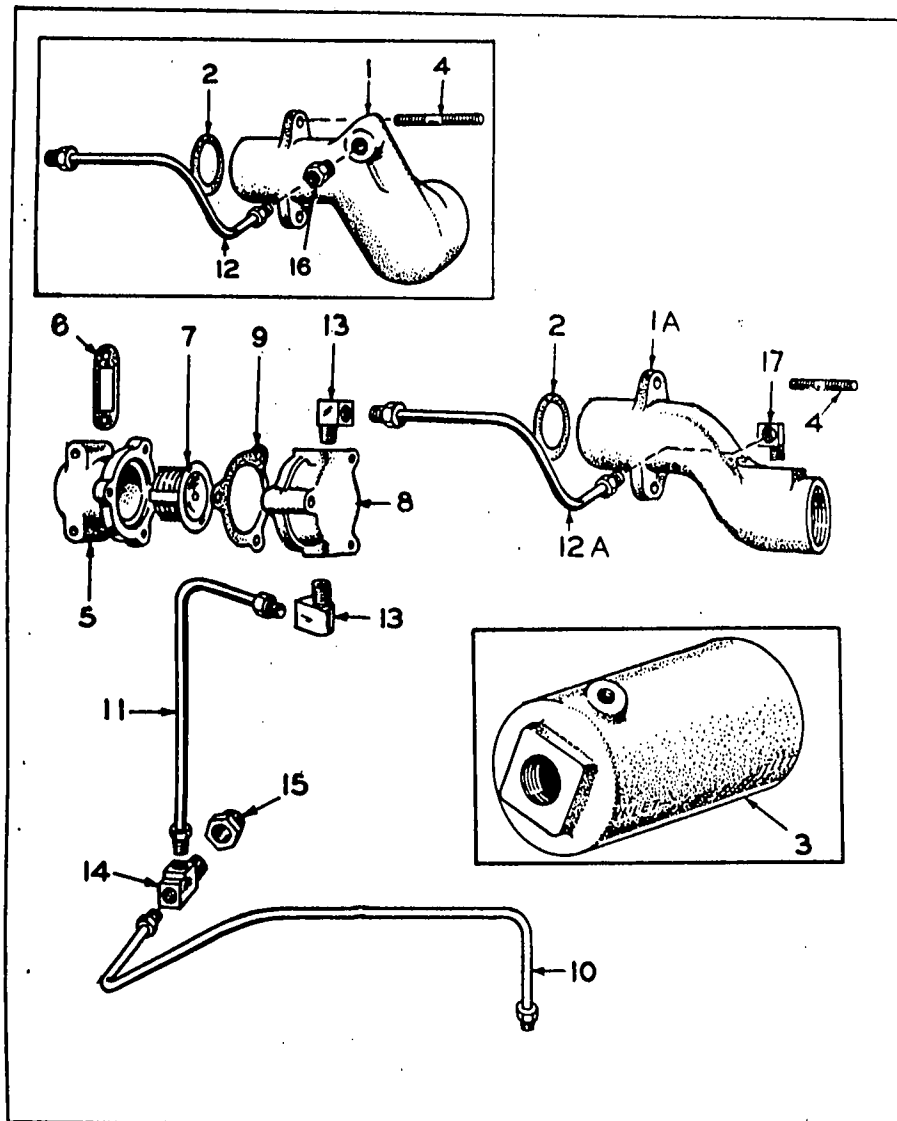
MUFFLER,THERMOSTAT AND EXHAUST GROUP
